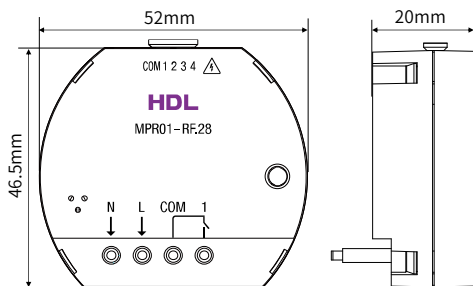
Dimensions - Front View    Figure 3. Dimensions - Side View
